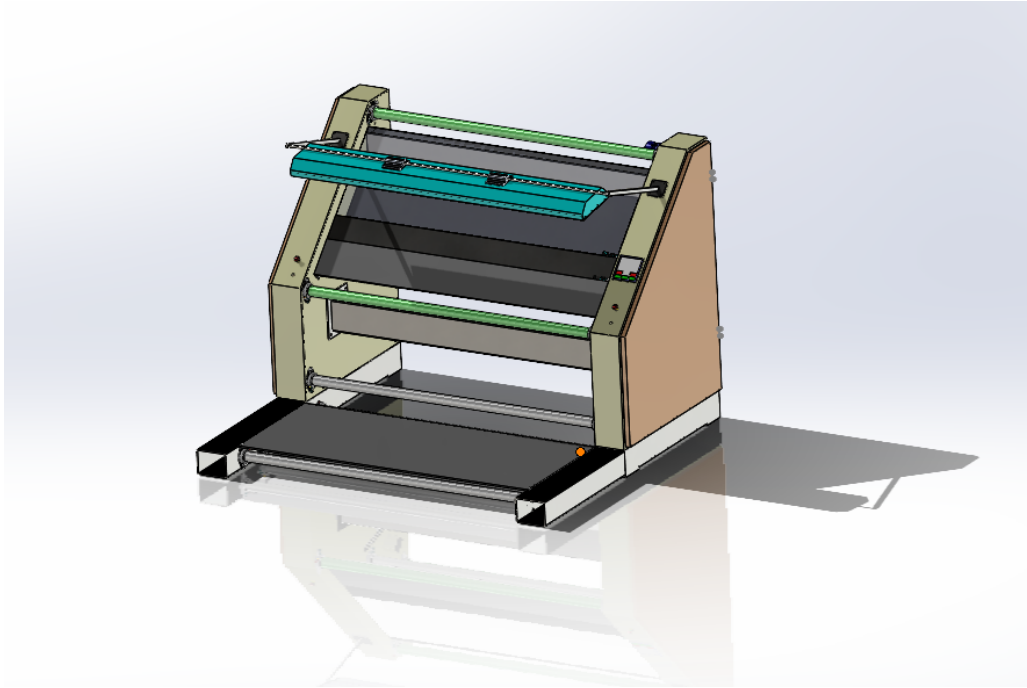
Inspection Unit – Central Viewing and Guiding Section
